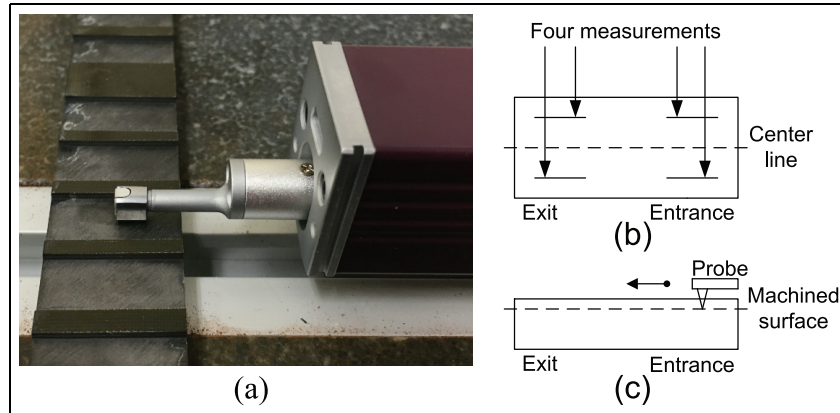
Measurements of surface roughness: (a) measurement setup, (b) top view, and (c) side view.
